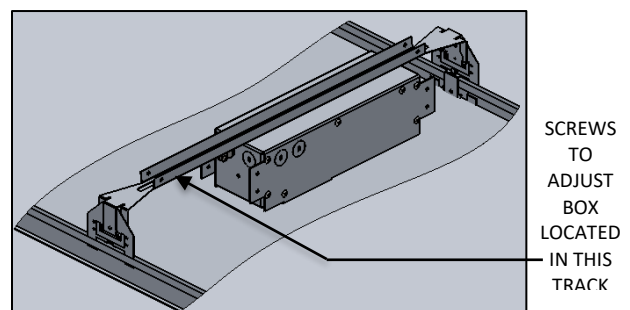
J-BOX ASSEMBLY ORIENTATION
